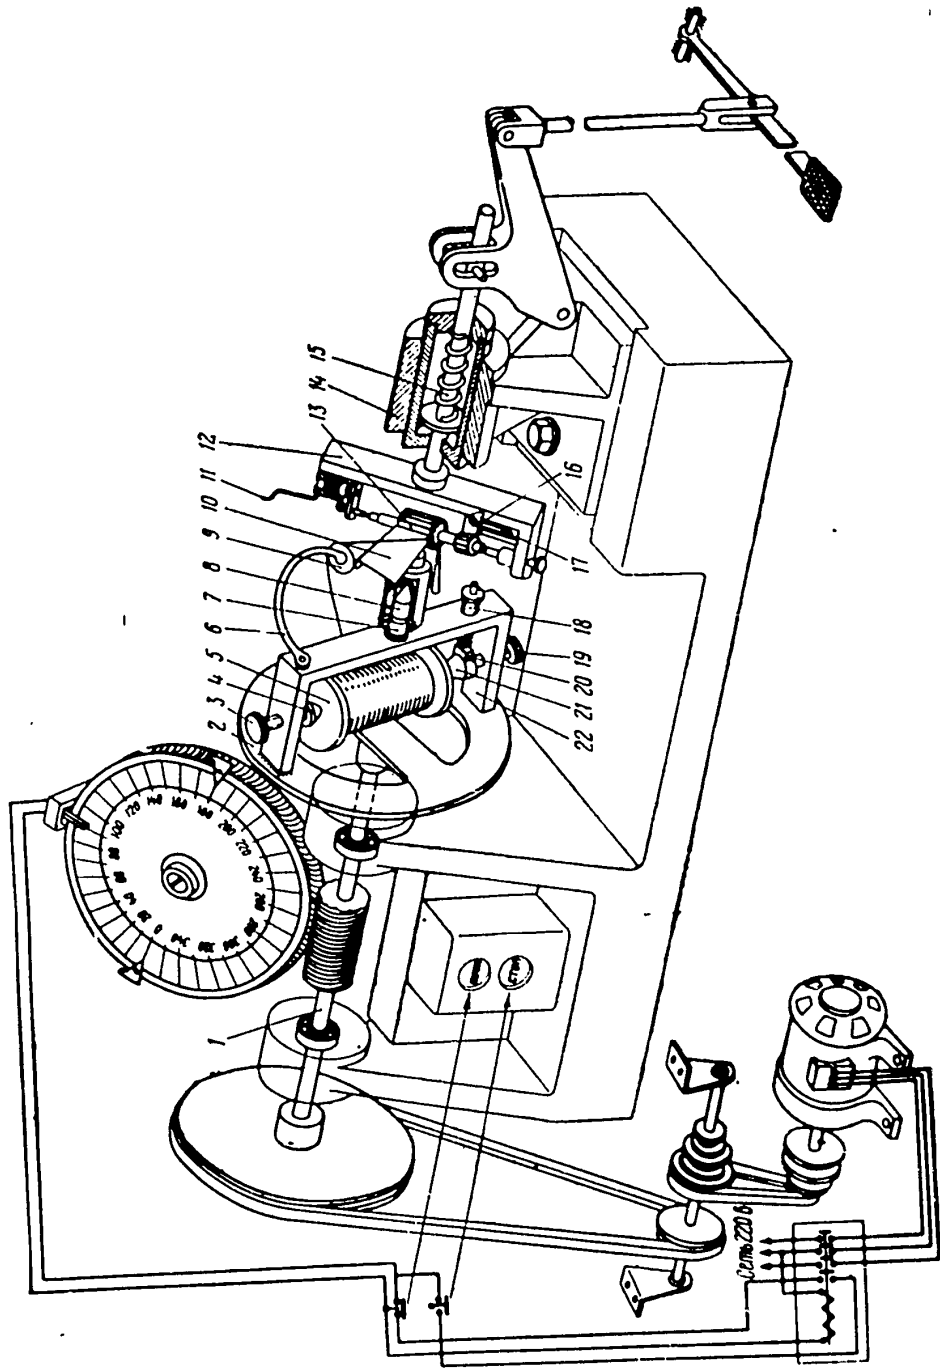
Electro-kinematic Arrangement of the Machine SMYa-3
